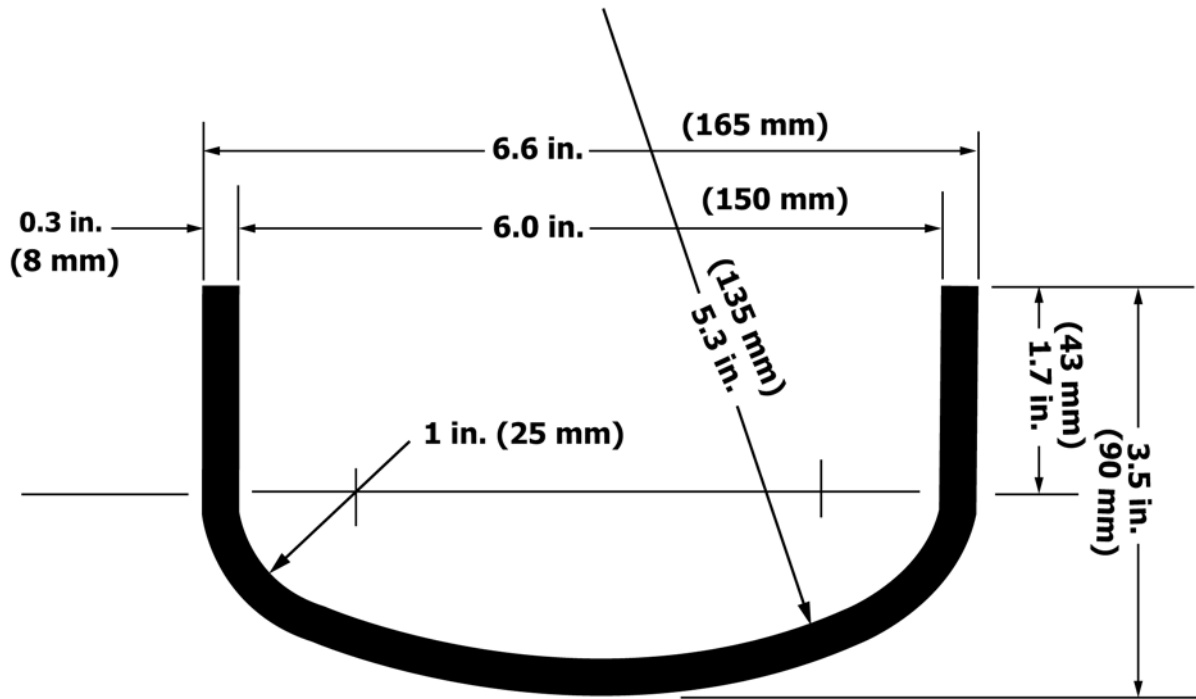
Standard 6 in. (150 mm) Weld Cap
